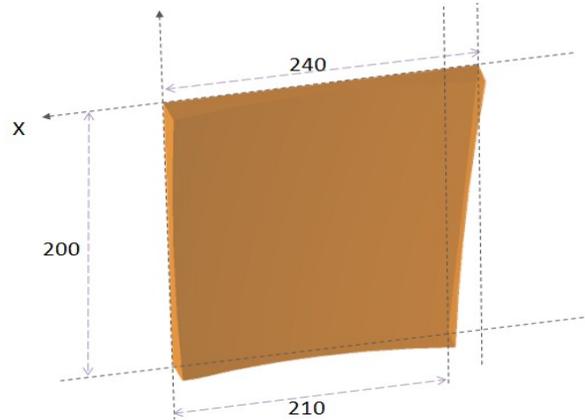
The windshield corrector. Dimensions shown are in mm.
